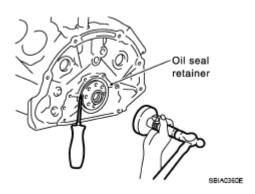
Removing/Installing Rear Oil Seal Courtesy of NISSAN MOTOR CO., U.S.A.
